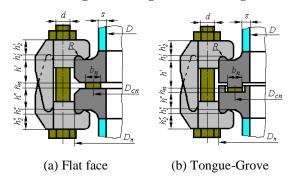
Flanges for fasteners according to OST 26-01-396-78
